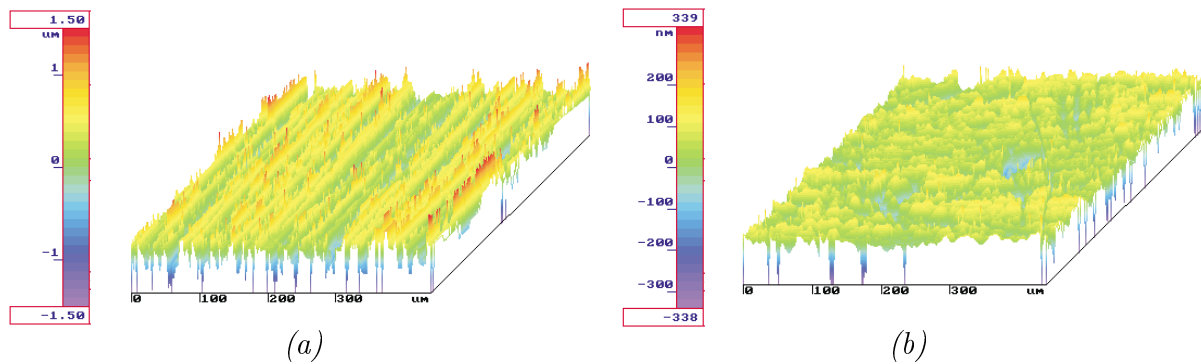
Surface heights of bearing C. (a): For the outer raceway. (b): For the roller.
